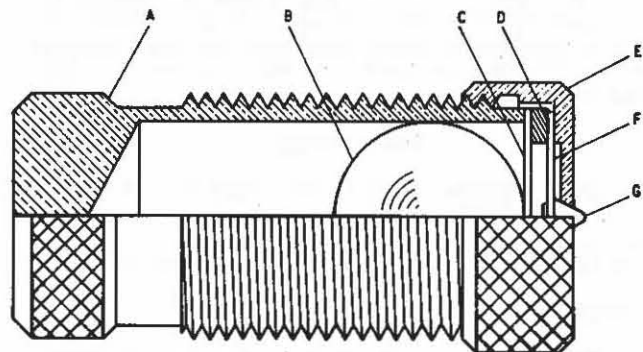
Cut-a-way View of Stationary Contact Assembly
